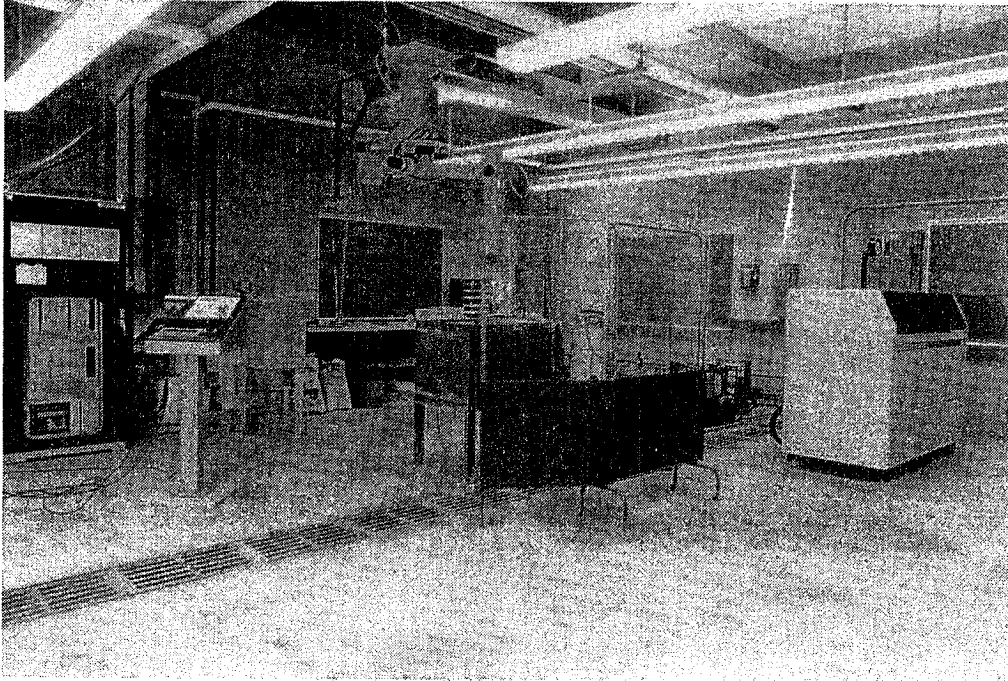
High Pressure Pumping System and Pneumatic Abrasive Feed Unit
